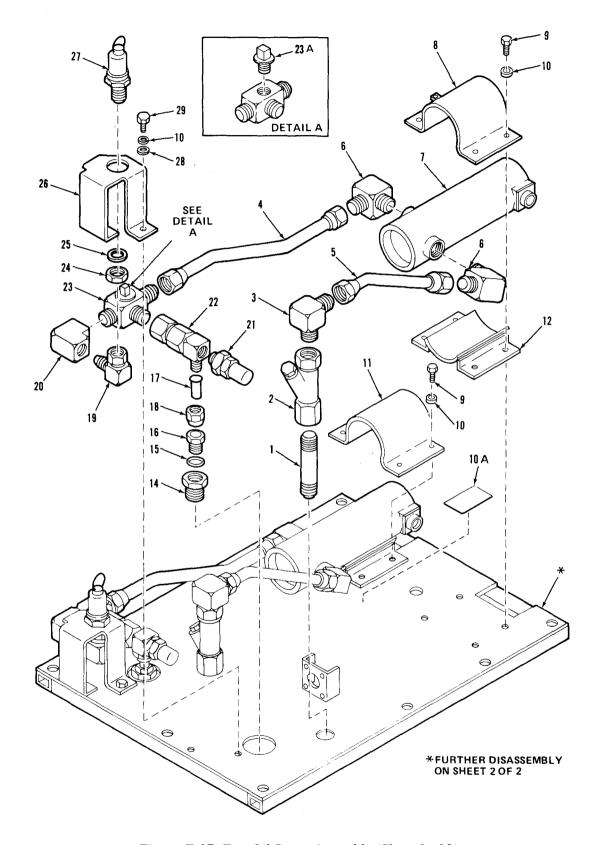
Fog Oil Pump Assembly (Sheet 1 of 2)
